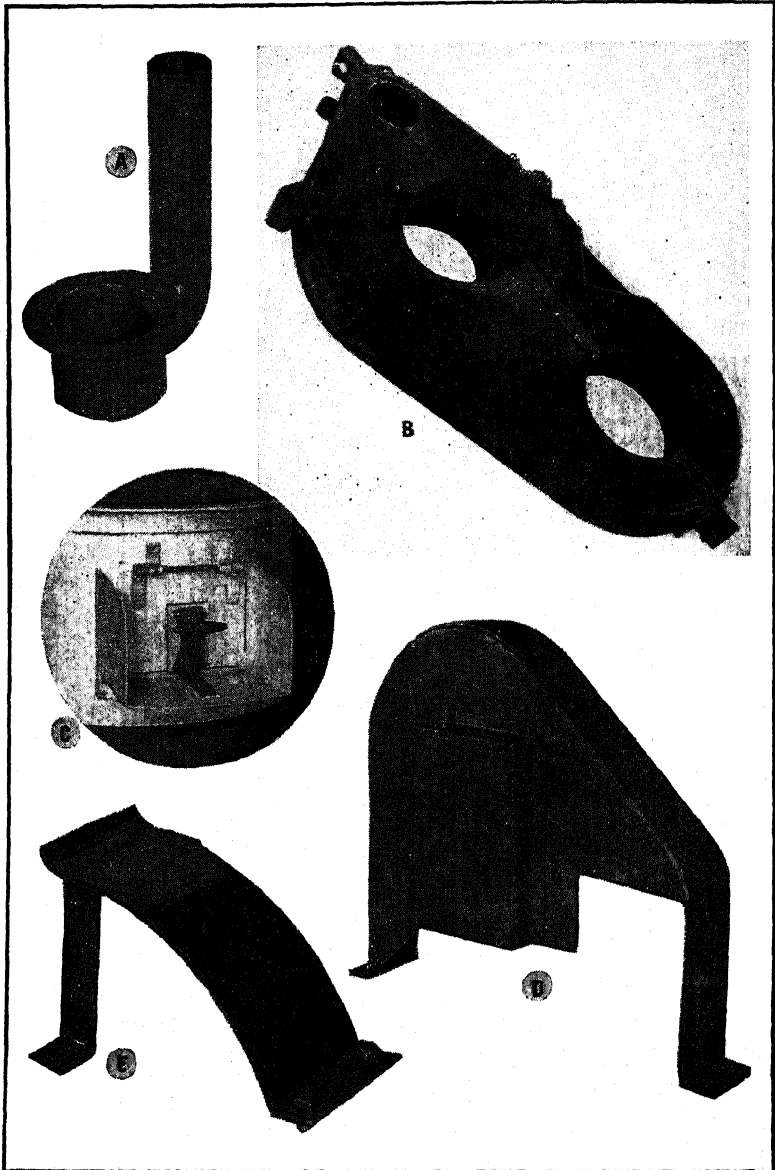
Covers—(A) Air cleaner hood for crawler shovel engine. (B) Gear-case for mining locomotive. (C) Door for vegetable peeler. (D) Belt guard for compressor. (E) Sheave guard for crawler shovel.
